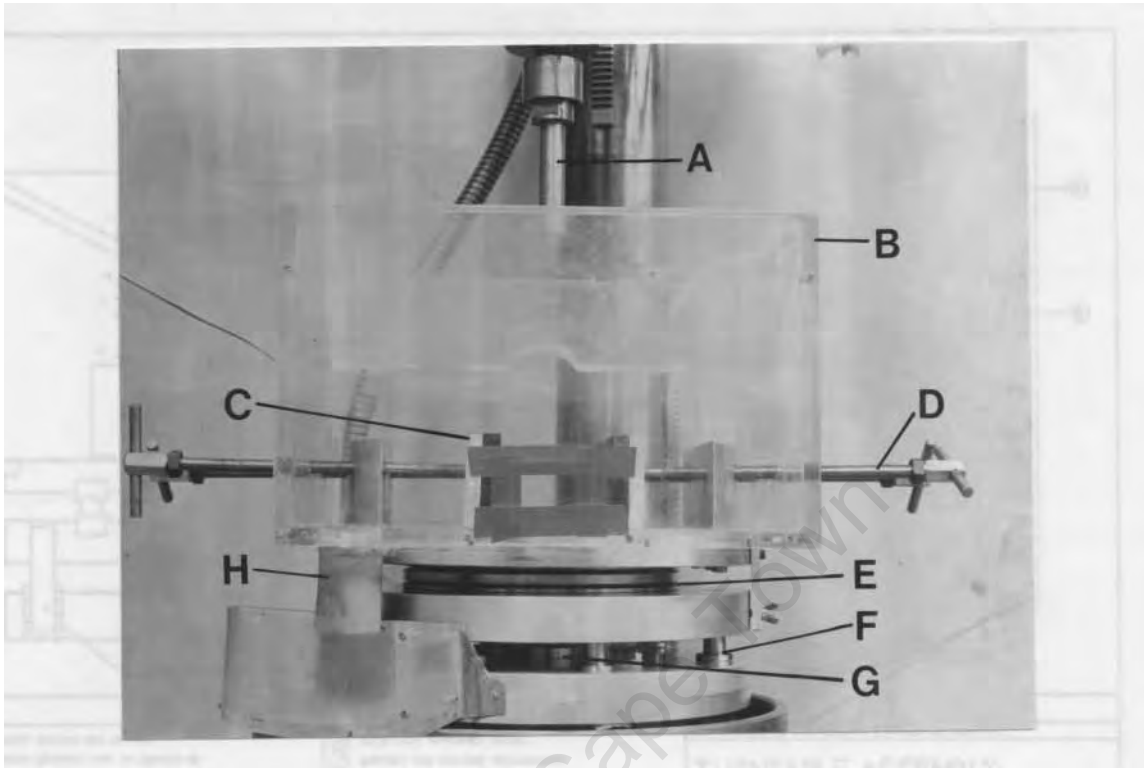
The Arboga machine showing detail of the turntable, specimen holder and bit assembly (photographed by Mr B. Greeves)
